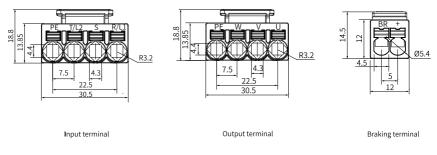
Main circuit terminal dimensions (mm) of T2 models
